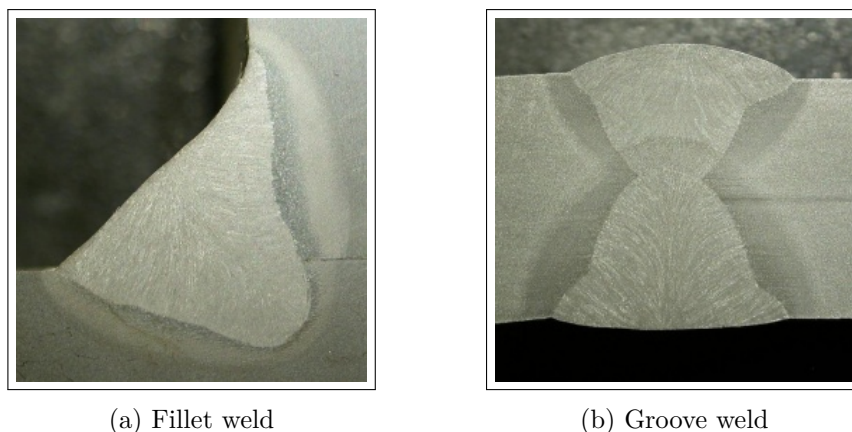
Different types of welded connections (Steelconstruction.info, 2016b)
